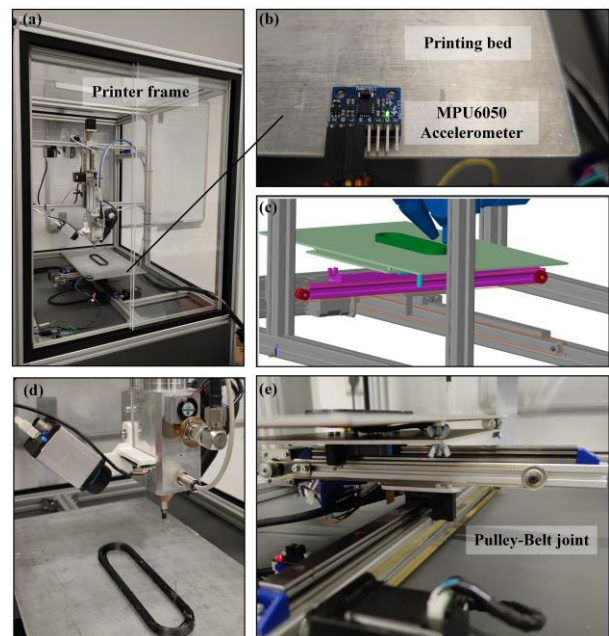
(a) Printer frame of the 3D microwave printing system, (b) MPU6050 accelerometer placed on the printing bed, (c) Simscape simulated pulley-belt joint of the printing bed, (d) MW printing head and the printed O ring composite part, (e) printing bed installed on the pulley-belt joints.
